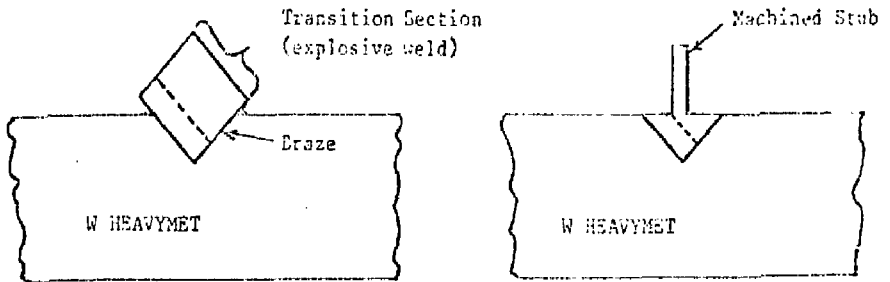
TRANSITION SECTION DESIGN USING COMBINATION OF EXPLOSIVE WELDING AND BRAZING
